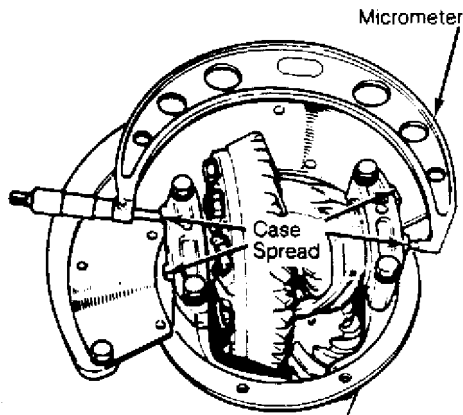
Adjusting Differential Bearing Preload (Case Spread)
